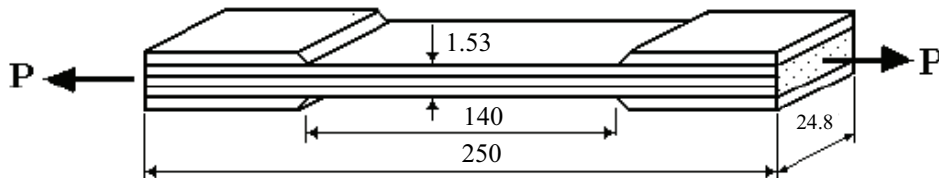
Specimen geometry and dimensions for longitudinal properties in test
